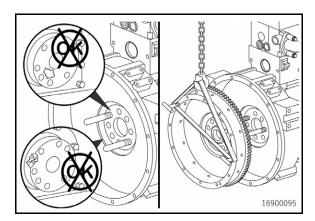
INSPECT THE REAR FACE OF THE CRANKSHAFT AND FLYWHEEL MOUNTING FLANGE
